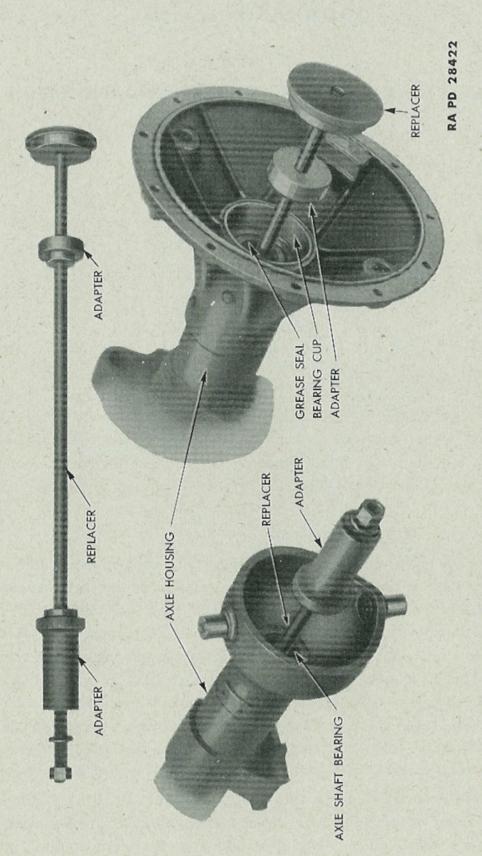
Installing Grease Seal, Differential Bearing Cup and Axle Shaft Outer Bearing in Axle Housing with Replacer 41-R-2390-900 and Adapters M8-116-A, B and C
